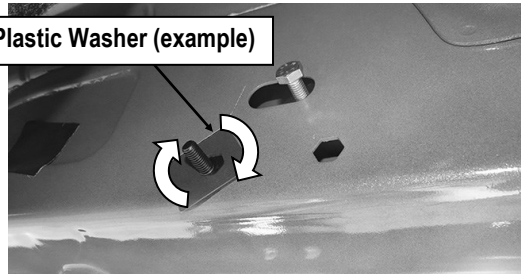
Thread (1) M8X1.25-30 Hex Bolt into the welded nut on the plate. (Stop when bolt reaches end of nut as pictured)
